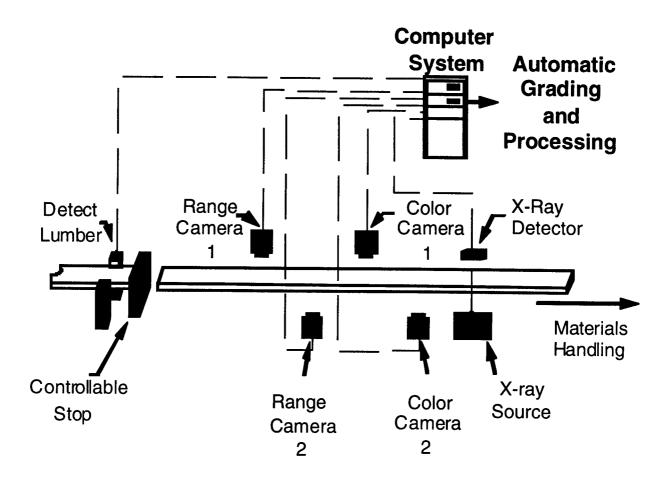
Schematic of the multisensory machine vision prototype for lumber inspection
